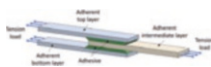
Adhesive bonding (double lap joint under tension load) [25]
